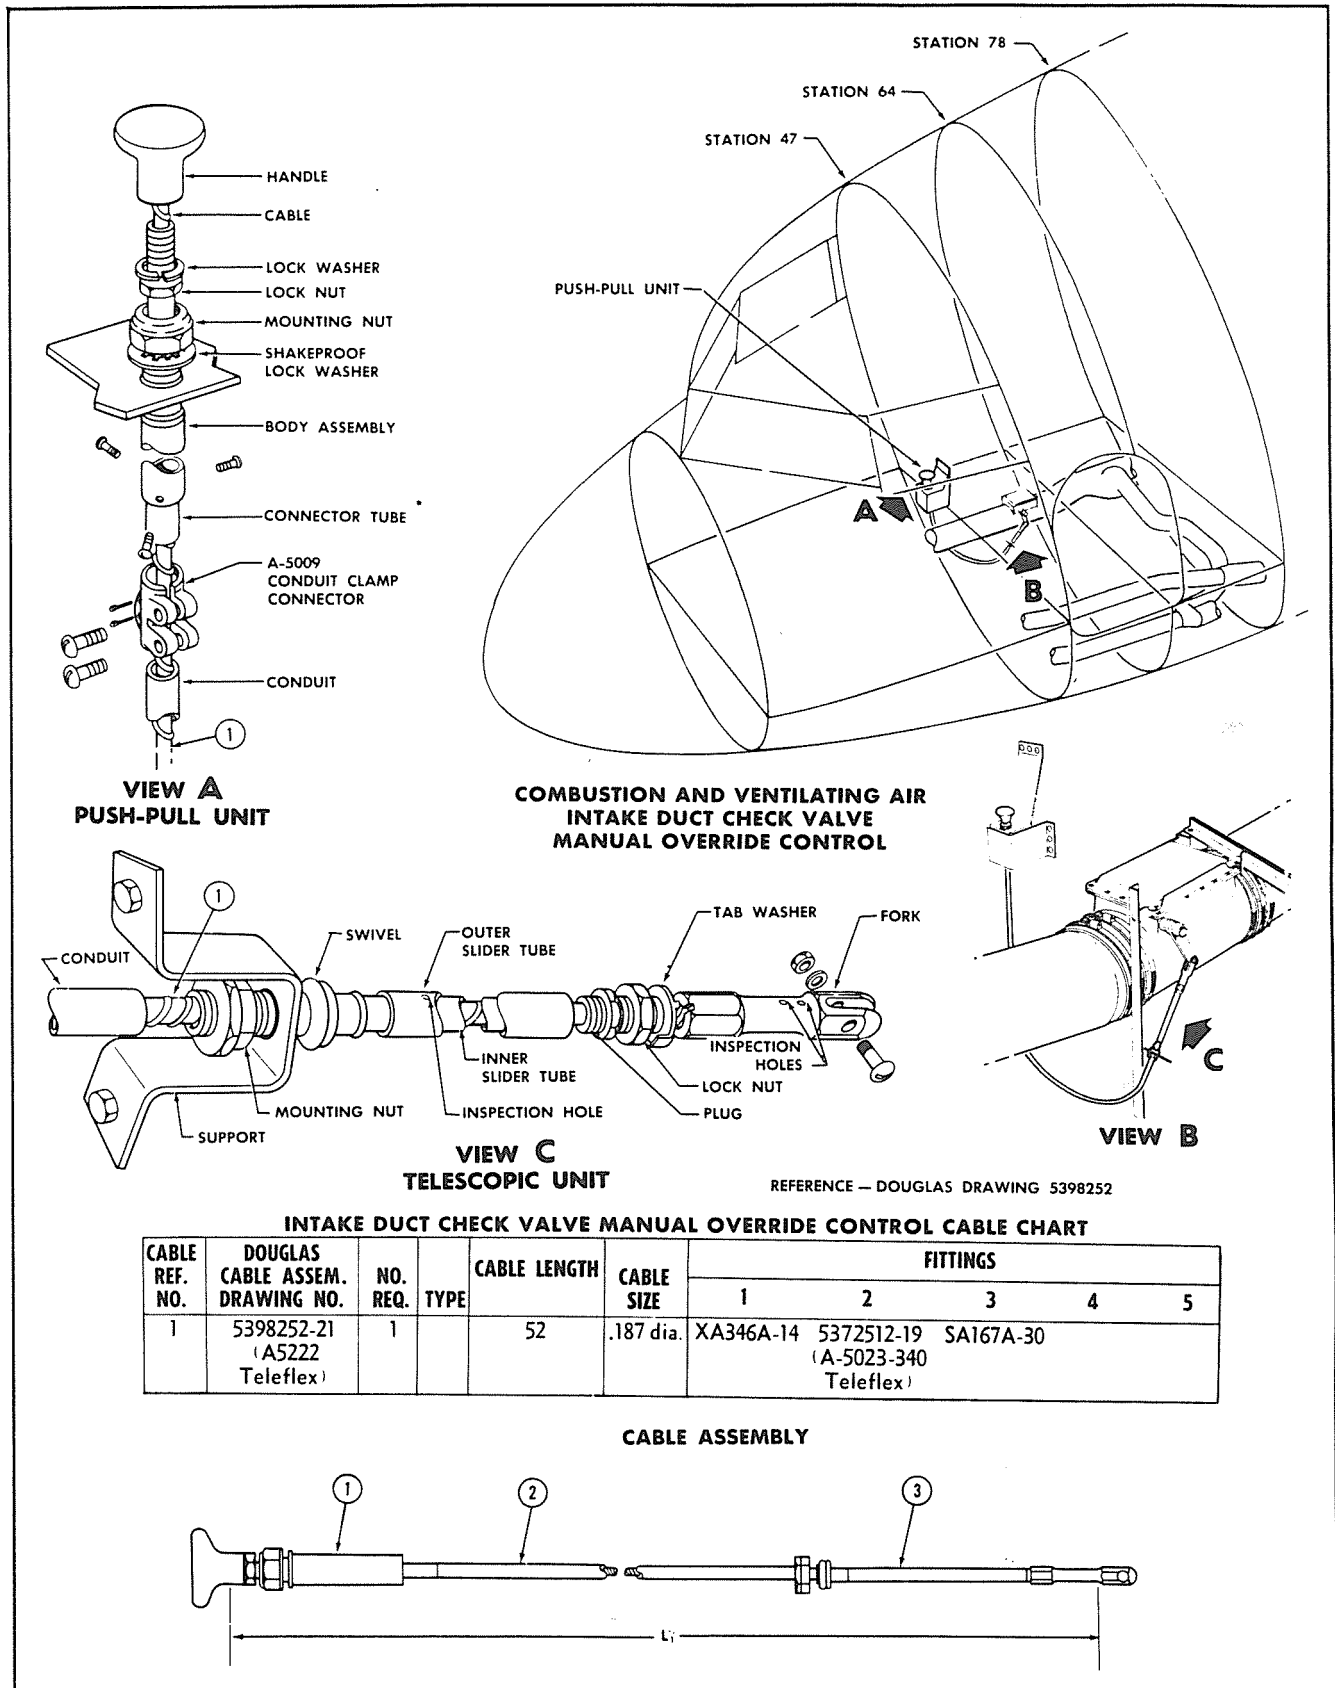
Combustion and Ventilating Air Intake Duct Check Valve Manual Override Control System
